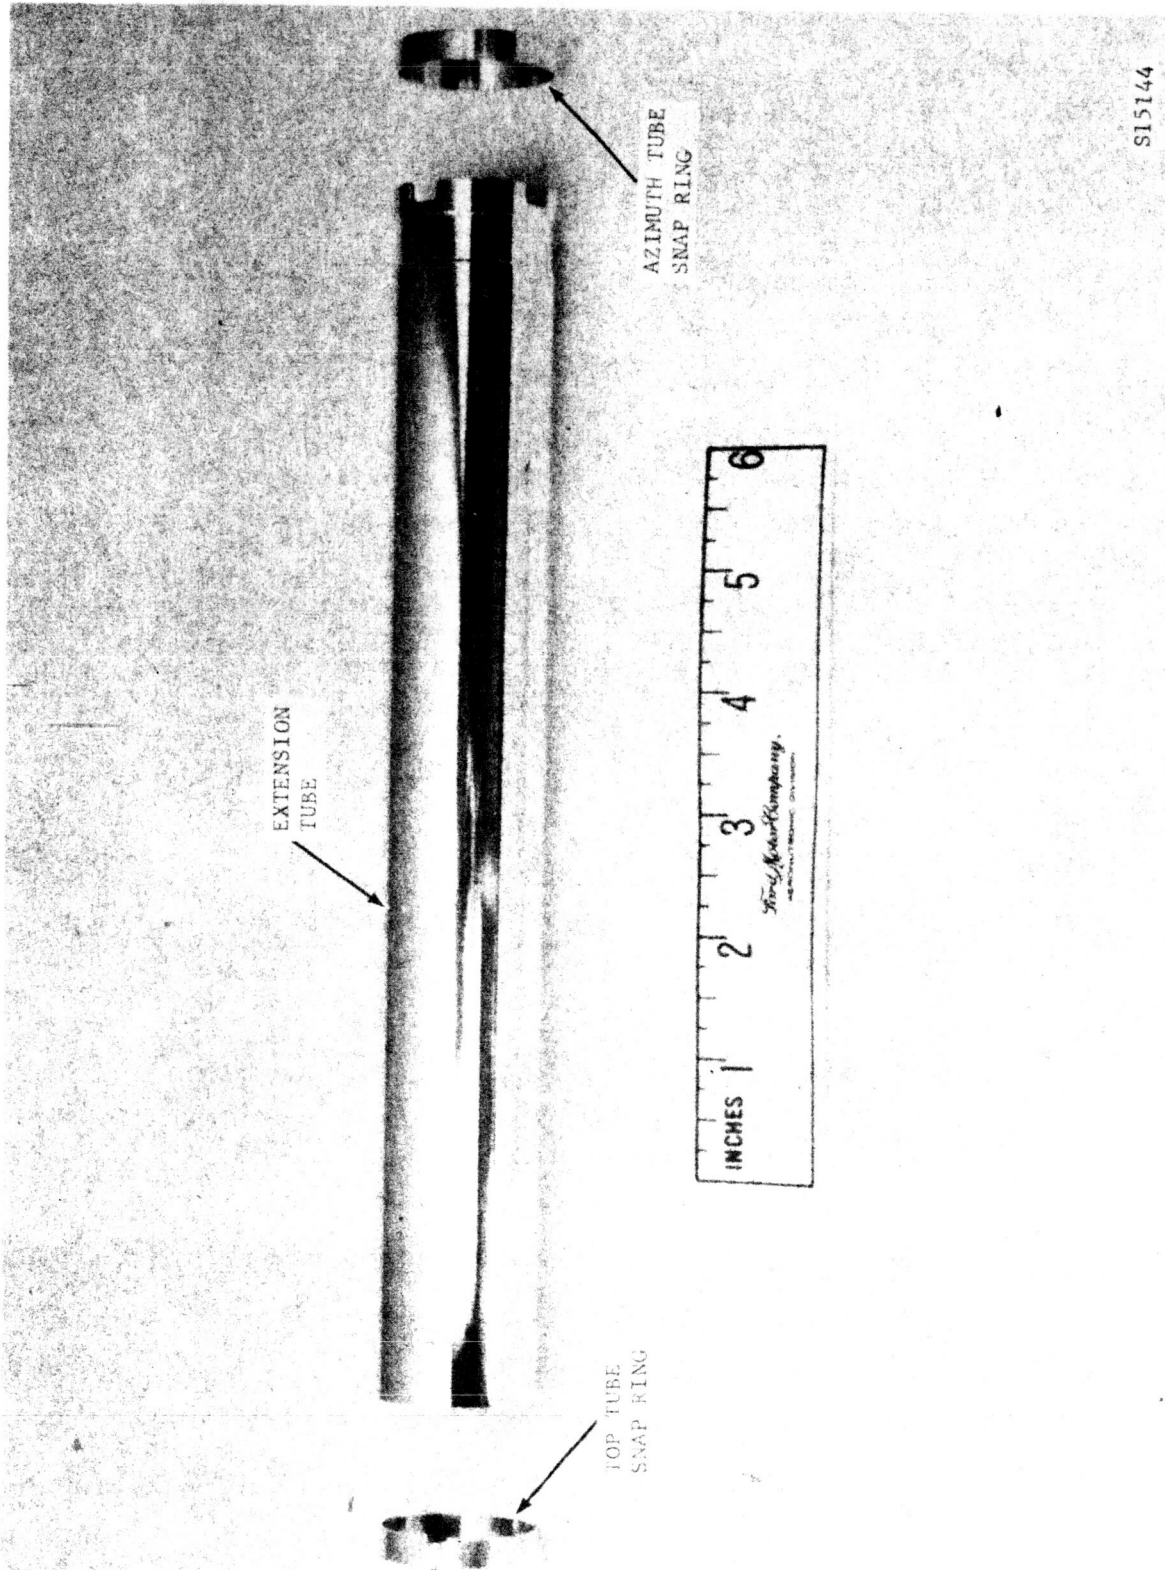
PROTOTYPE EXTENSION MECHANISM
